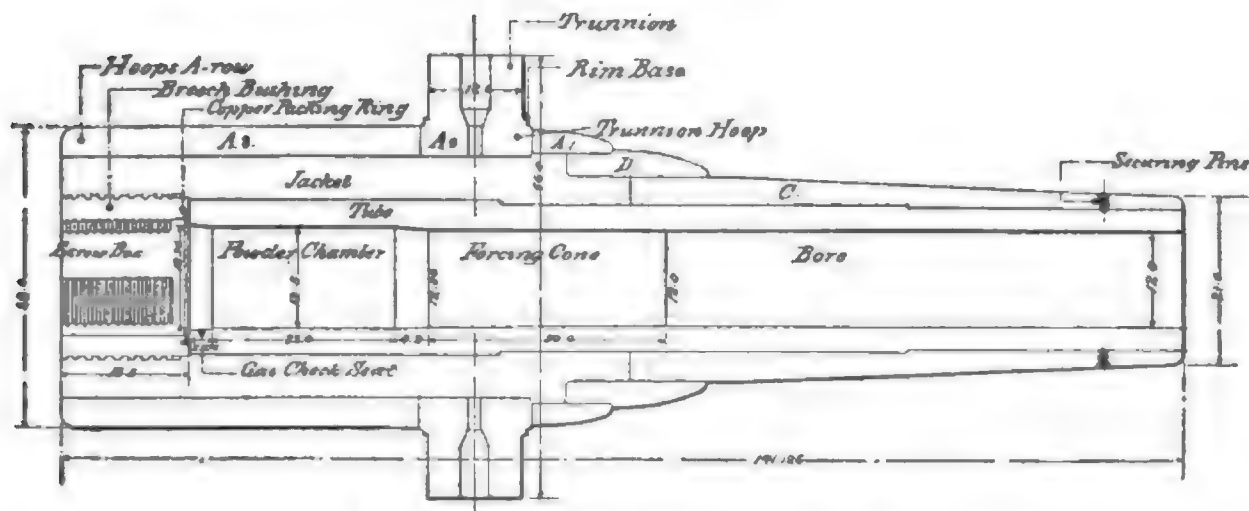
12-INCH BREECH-LOADING STEEL MORTAR.
